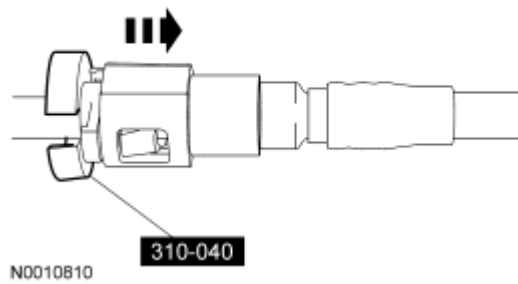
Disconnecting Quick Connect Coupling From Tube Using Special Tool (310-040)
